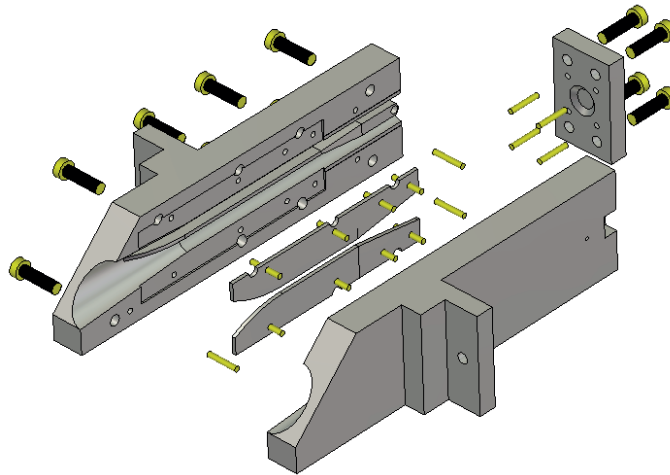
Model of the CNC feed prototype with five pieces, allowing only one LP.
